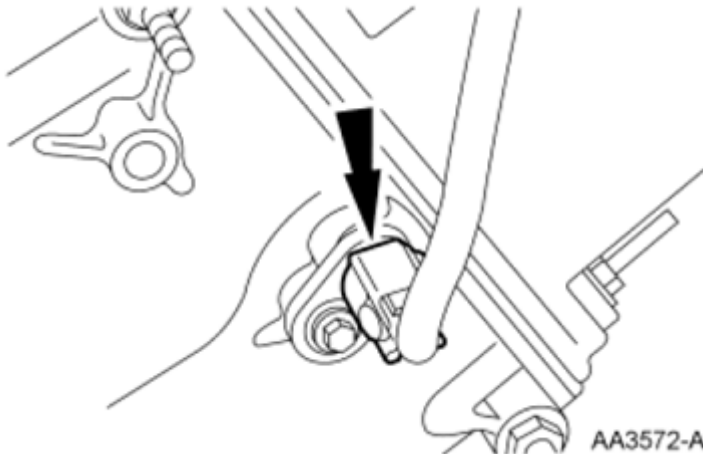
Locating Fuel Injector Electrical Connectors
